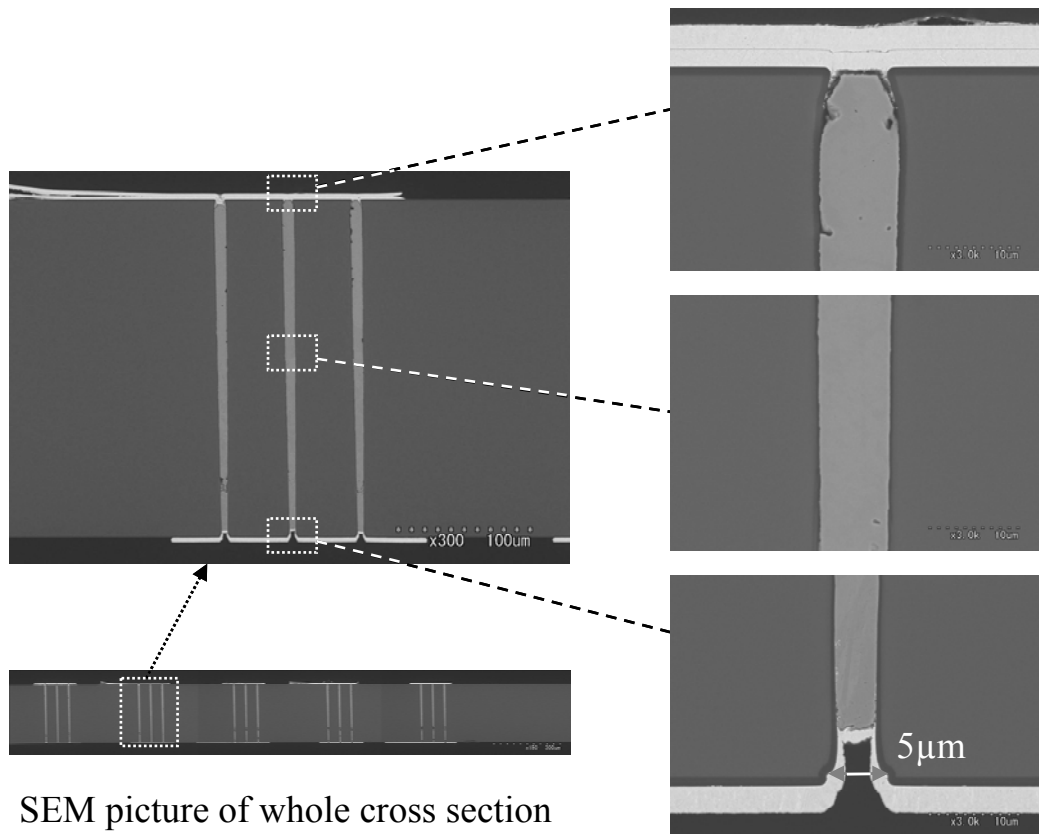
Cross-sectional views of bottom-up plated through-hole interconnections with 2- μm -thick seed layer.
